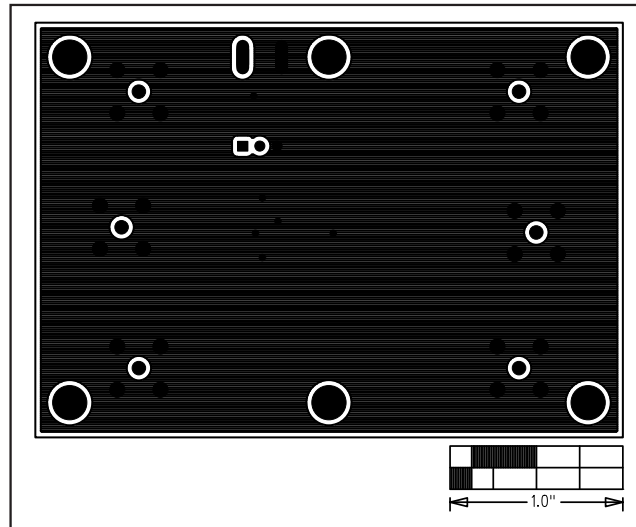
MAX9653 EV Kit PCB Layout—Solder Side
